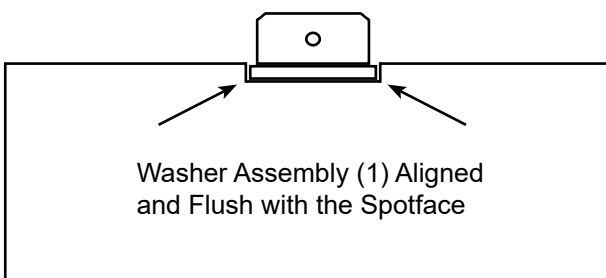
Acceptable Set Screw and Washer Assembly Alignment
